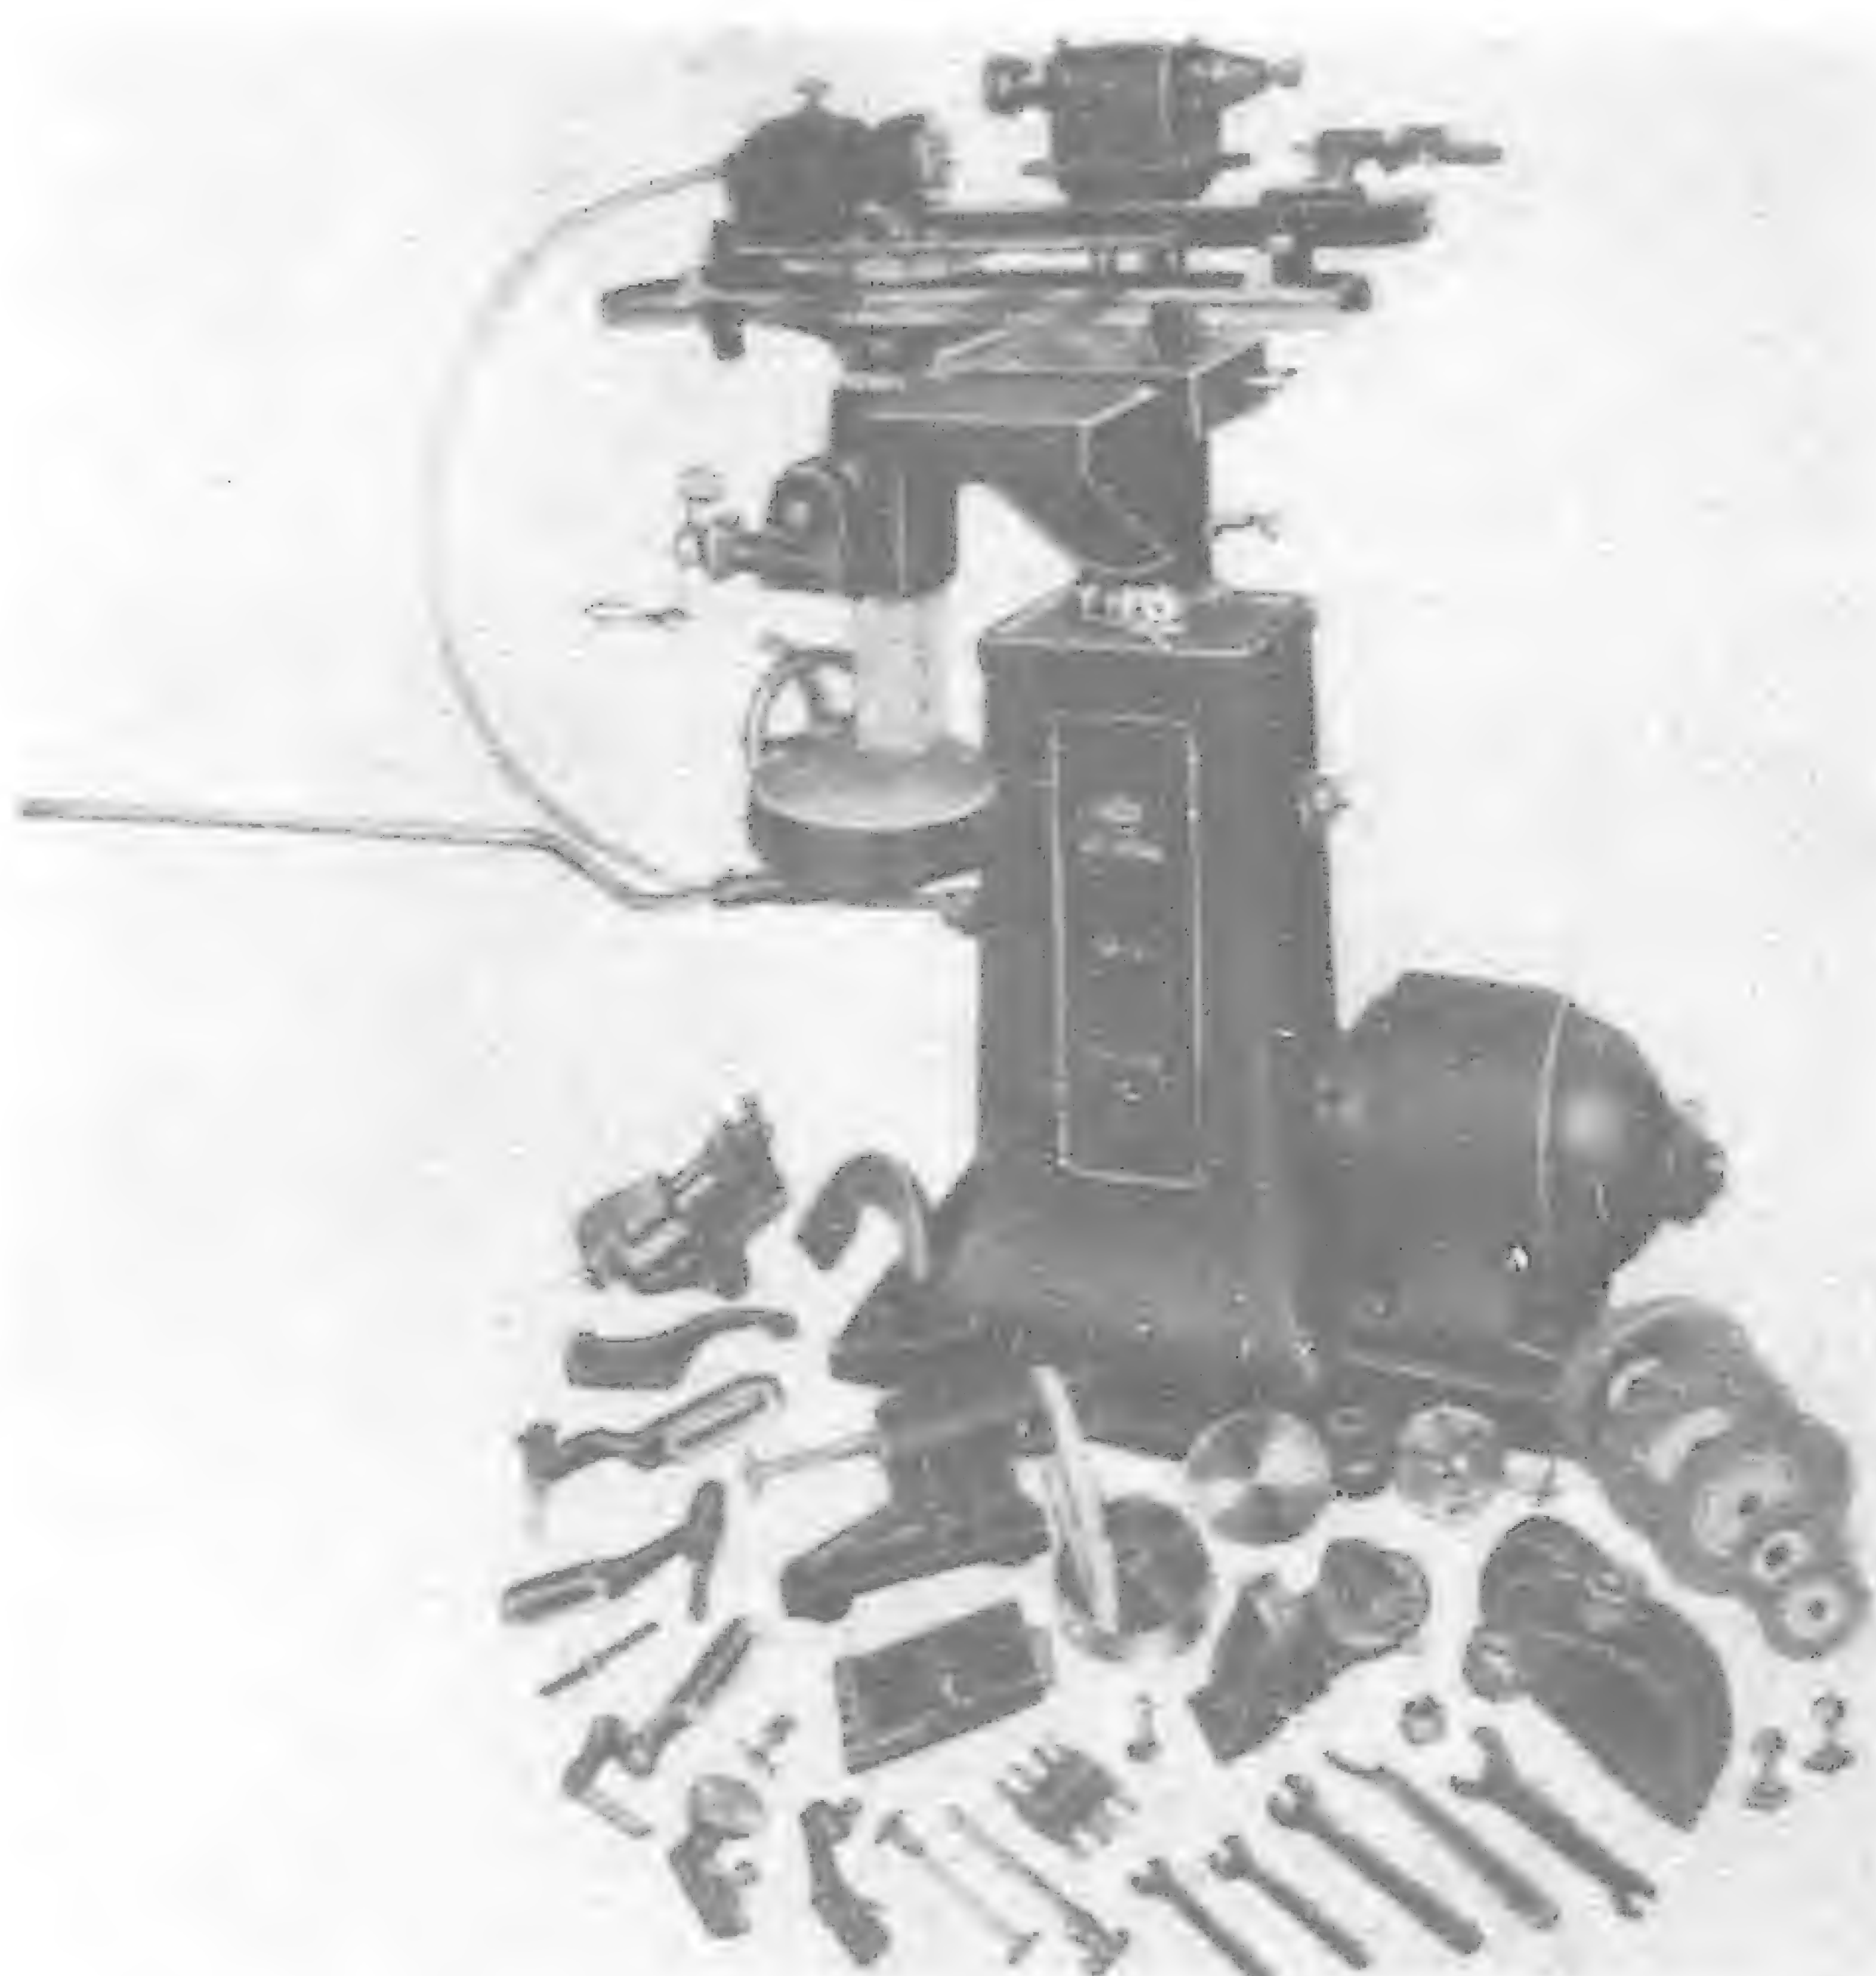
Universal Tool and cutter grinding machine. Spindle and gears made of Nickel-Chromium Steel. Manufactured by Awaji Iron Works
